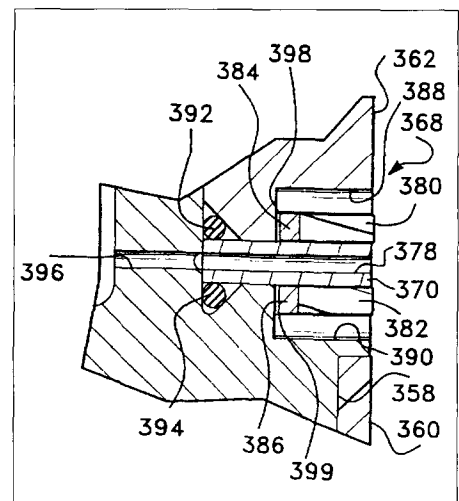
The sealing system of the Stirling engine's piston assembly.
